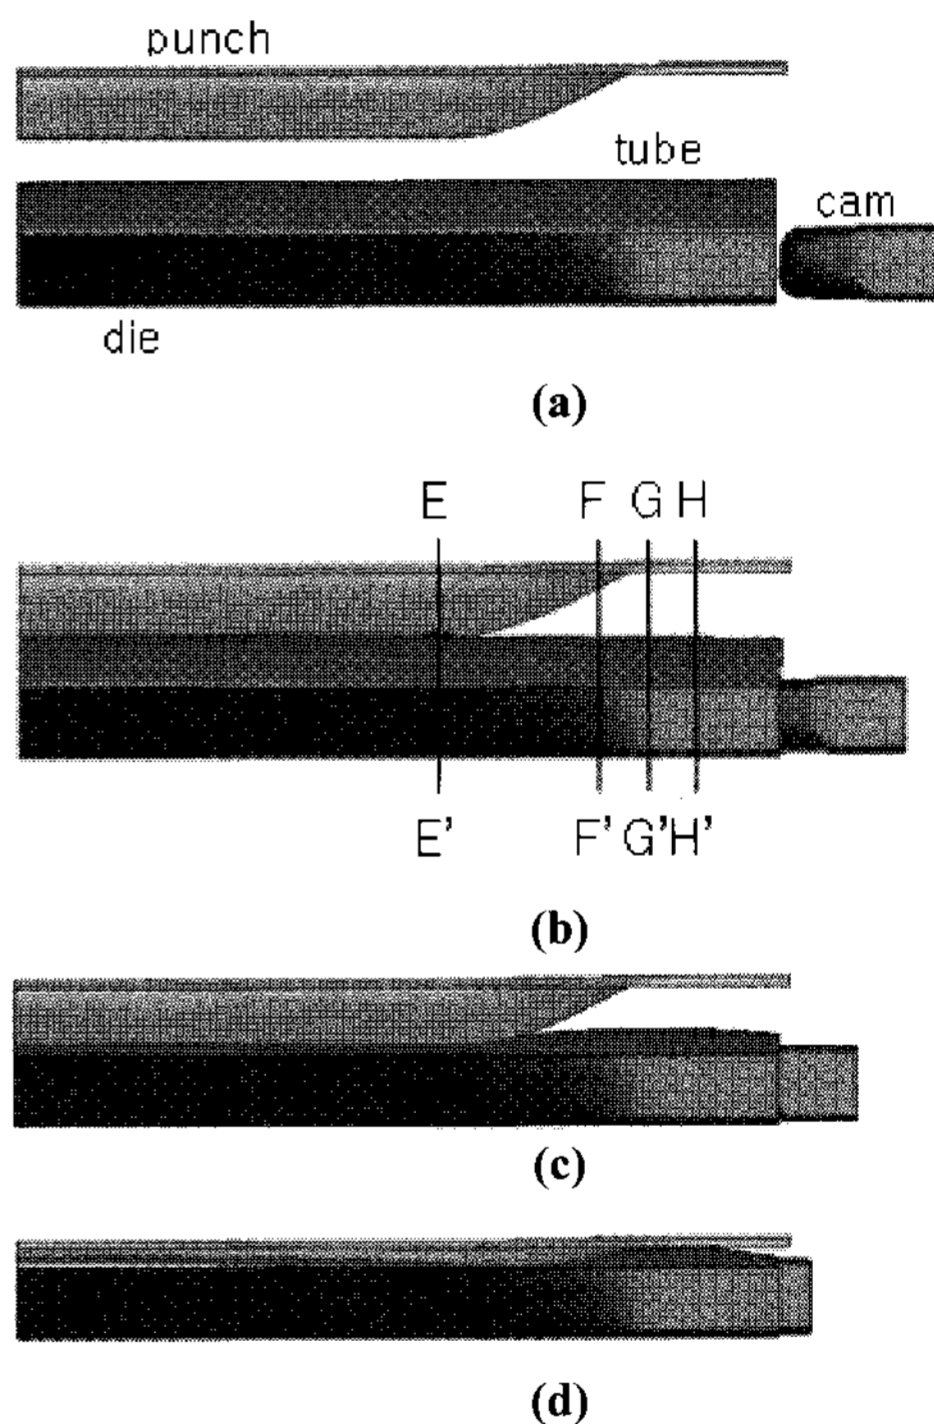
Subsequent deformed shapes of the tools and the tube with the modified design: (a) initial stage; (b) punch stroke = 32.6 mm; (c) punch stroke = 67.5 mm; (d) punch stroke=100.2mm
